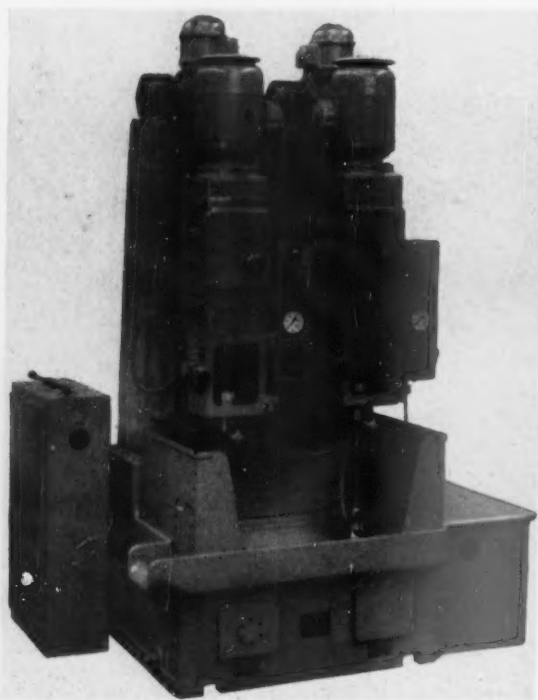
A Hille deep-hole boring machine fitted with a Beisner-type gutter head for boring finished-machined spindles
